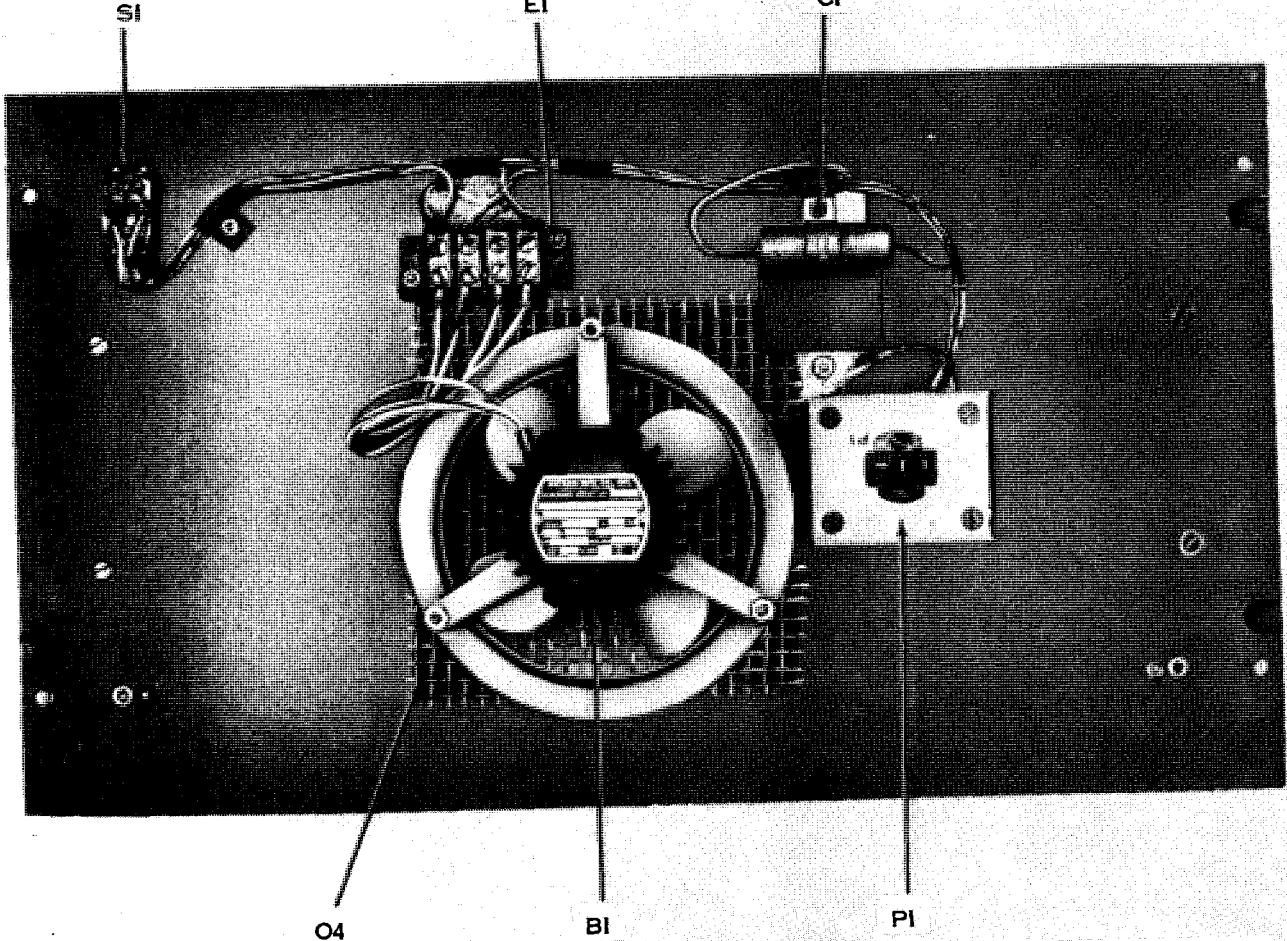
Electrical Equipment Cabinet Subassembly Mx-1482/TMQ-5, front view.
